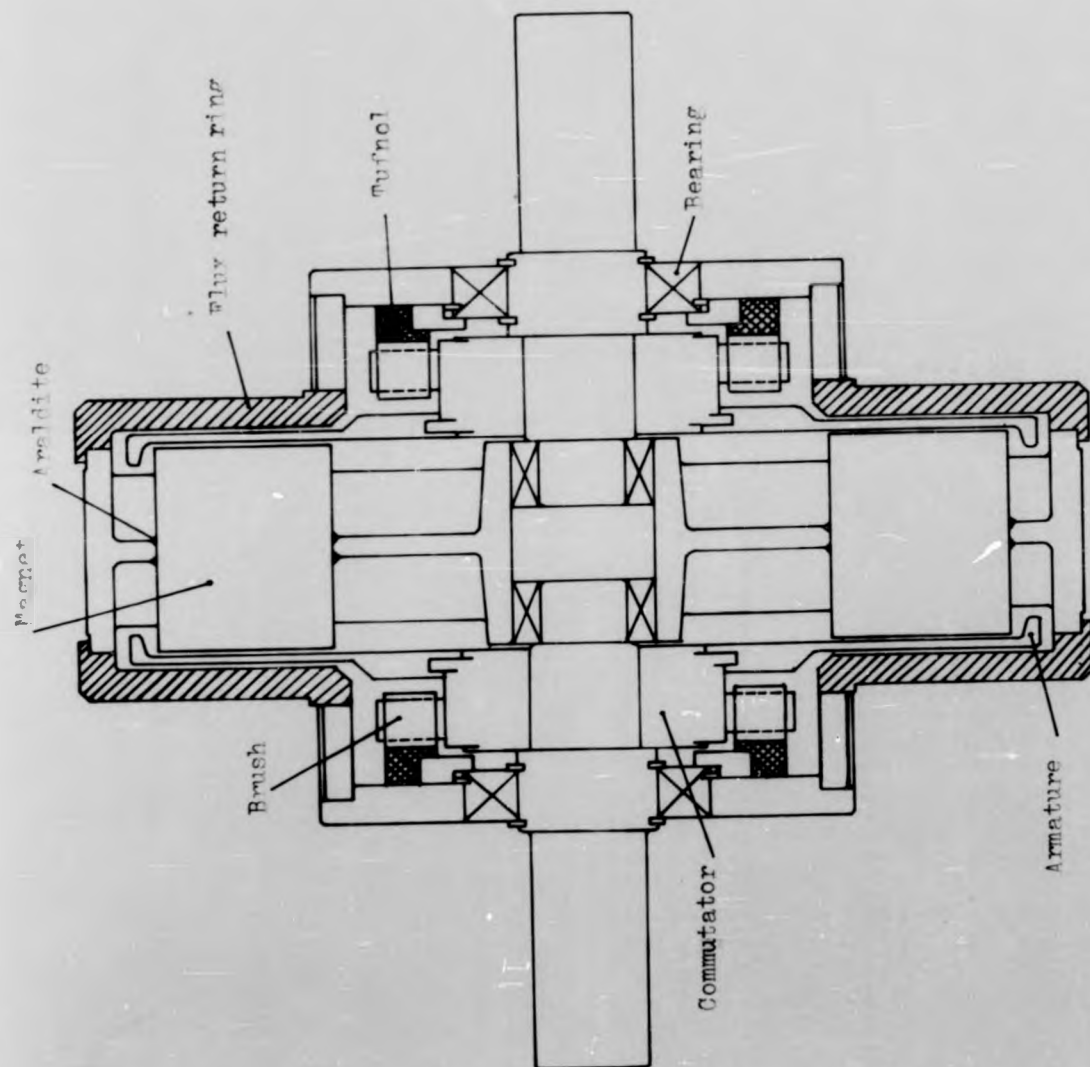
Twin rotor disc motor using Mucamax 111
